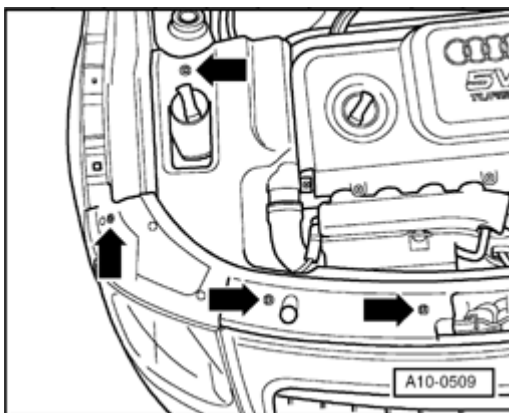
Removing Covers At Lock Carrier And Above Coolant Expansion Tank
